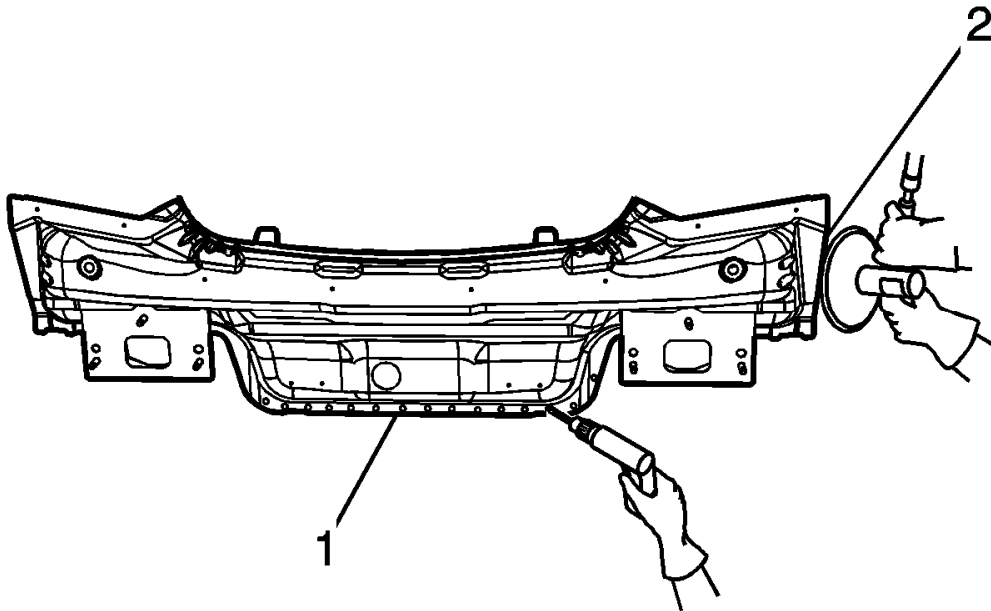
Drilling Plug Weld Holes Replacement Rear End Panel
